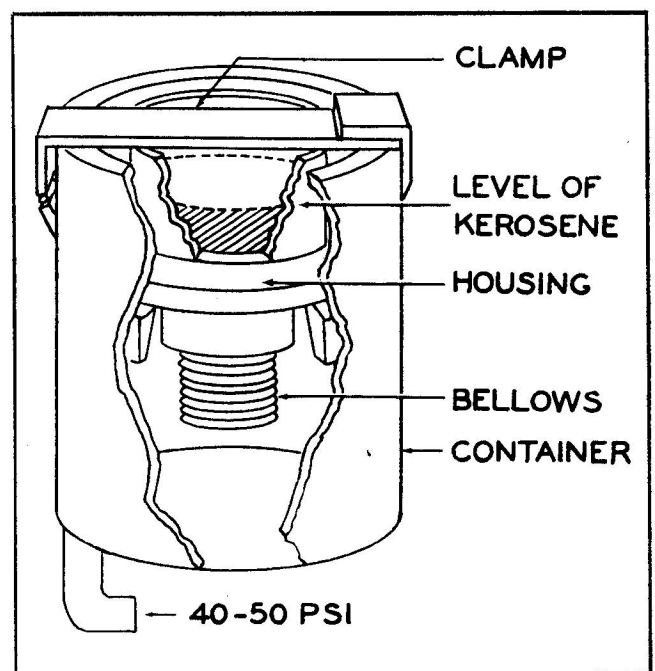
Testing Seal Between Bellows Seal Assembly and Housing for Leakage
